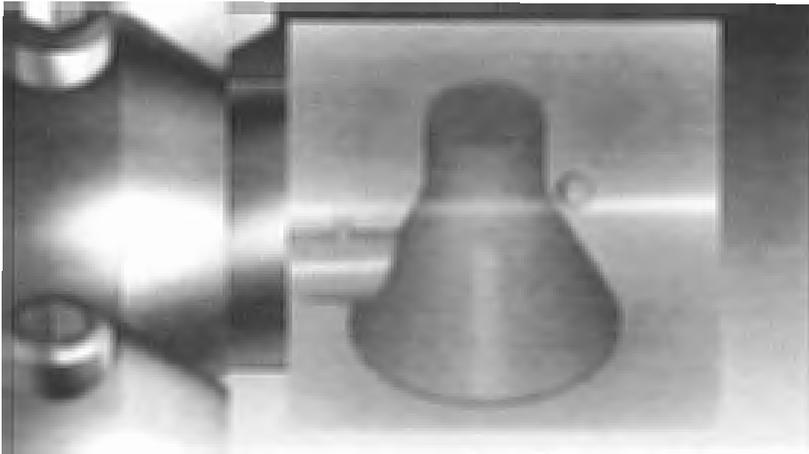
Half dumbbell specimen in virtual design showing sprue attachment
